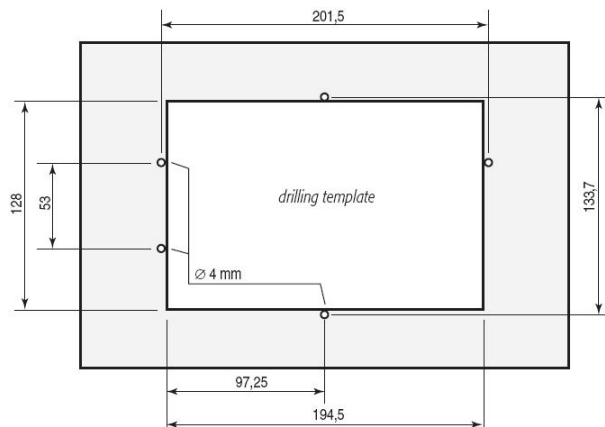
Dimensions (DBG2 & DBG3)
